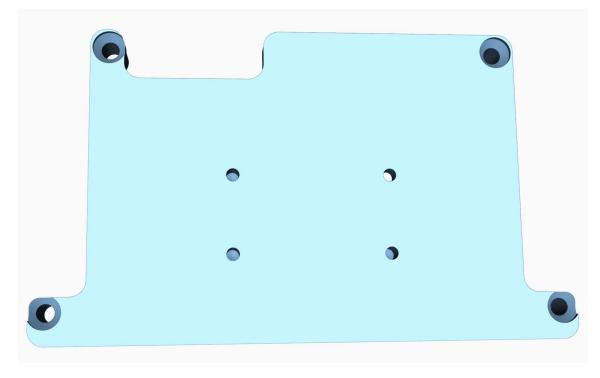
Heat Spreader 94-800913-3 Top Side View (faces away from SOM)
